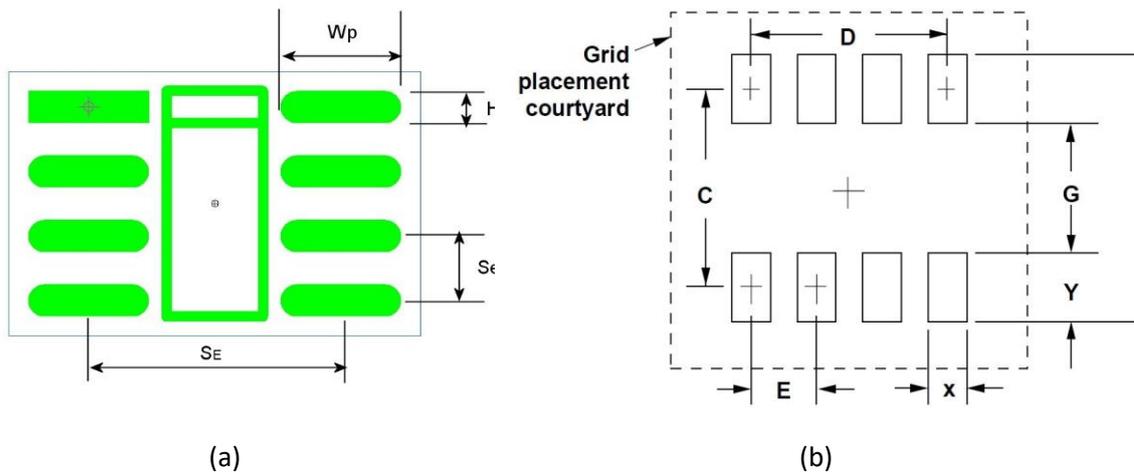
a) Package footprint in a CAD program, b) Symbols for different dimensions used in IPC standards
